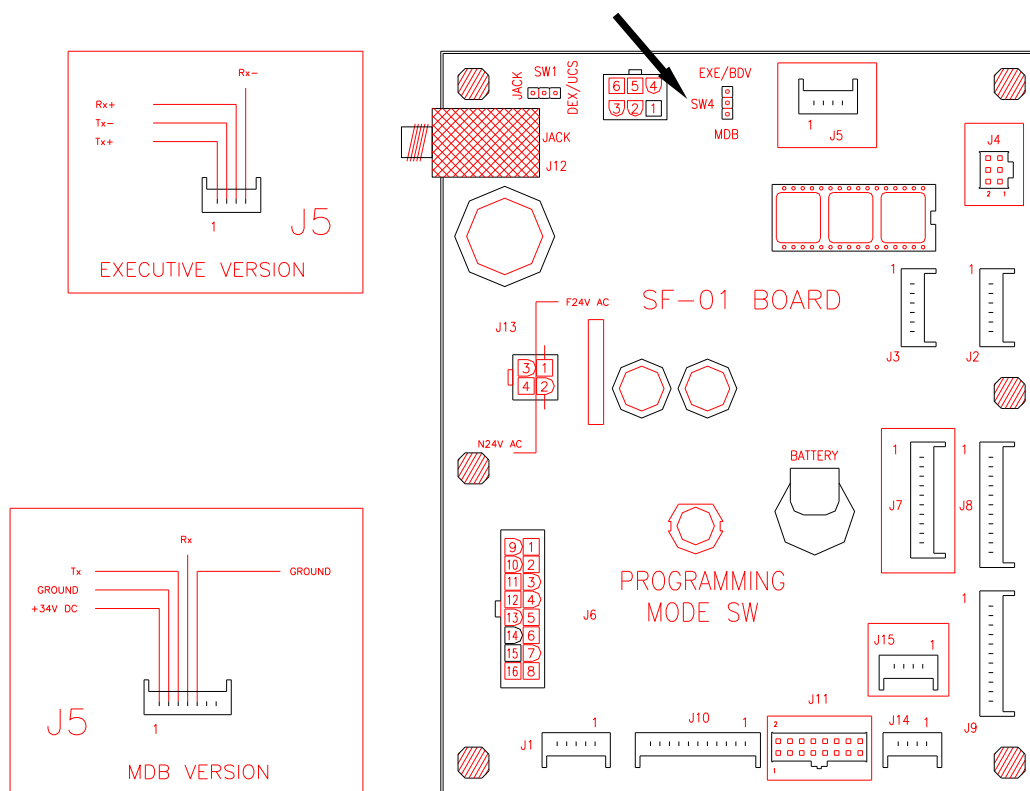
TURNING MDB / EXECUTIVE - SFO1 BOARD
